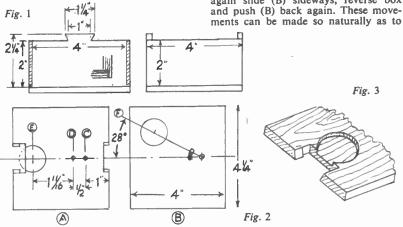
shows the lid parts, (A) being the lower one and (B) the upper one. Starting with part (A), draw a pencil line down the centre and on it mark off the points (C), (D) and (E) accurately. At each make a fine hole with an awl. Follow up by cutting out a dovetailed
